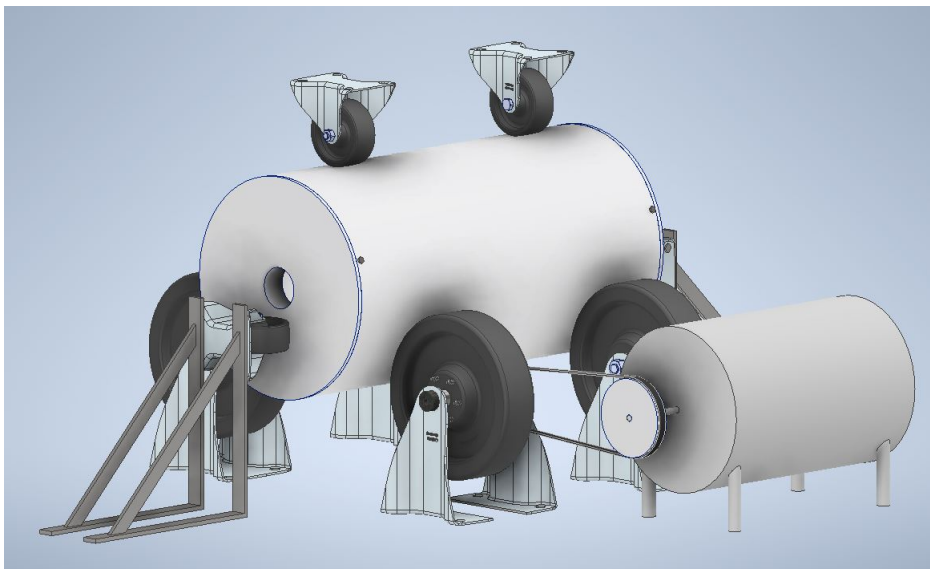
Assembly drawing of the structure with the motor and the transmission.
